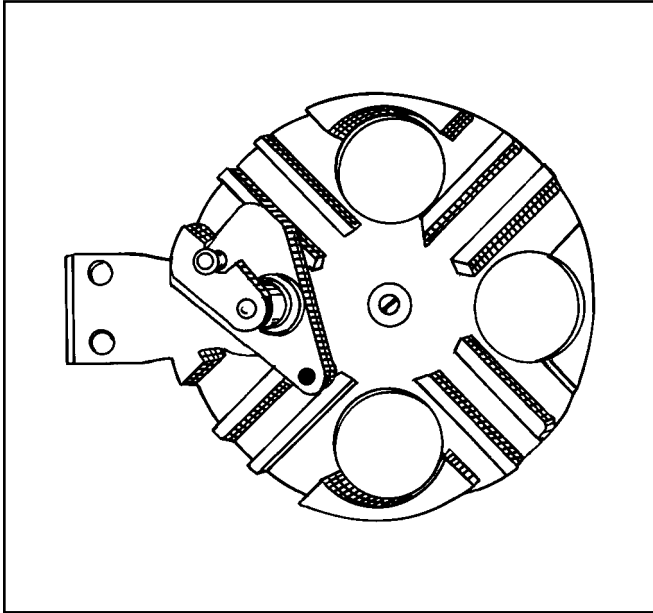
A four-slot internal Geneva wheel incorporating a locking mechanism. The basic sketch is shown in Fig. 3.
